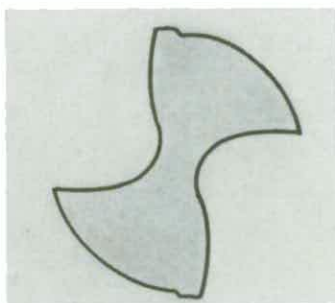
Transverse section through flutes of Kallio design chip breaker drill
